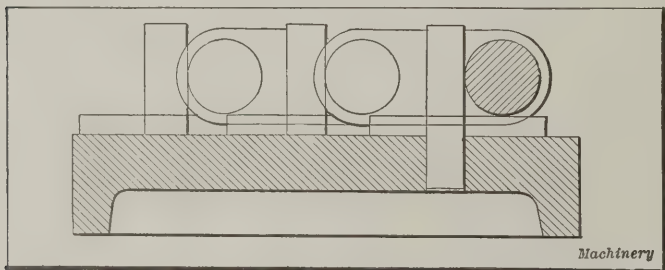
Section of Plate and Crankshaft in Fig. 1 in Enlarged Scale
